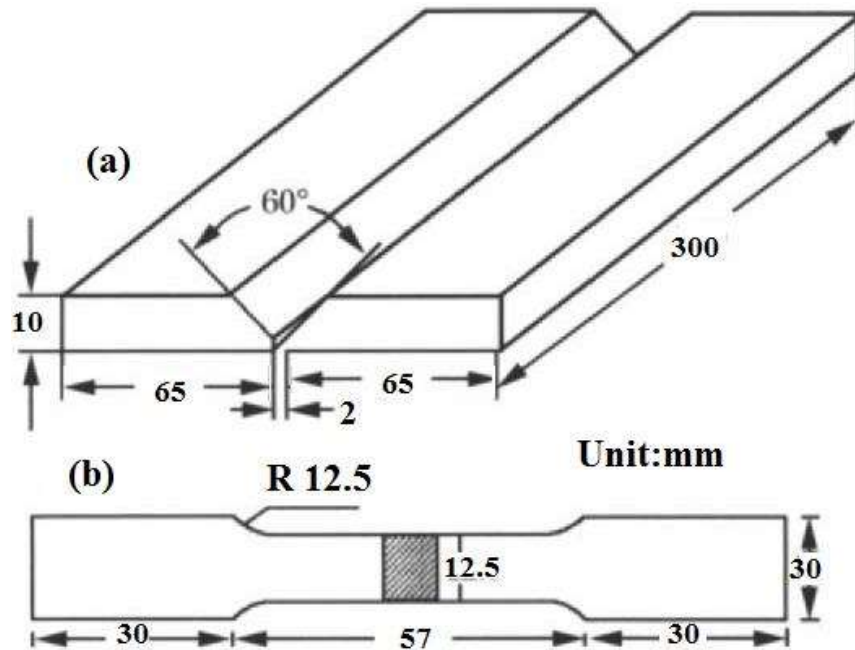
Dimensions of V-groove and tensile test samples in mm [89]
